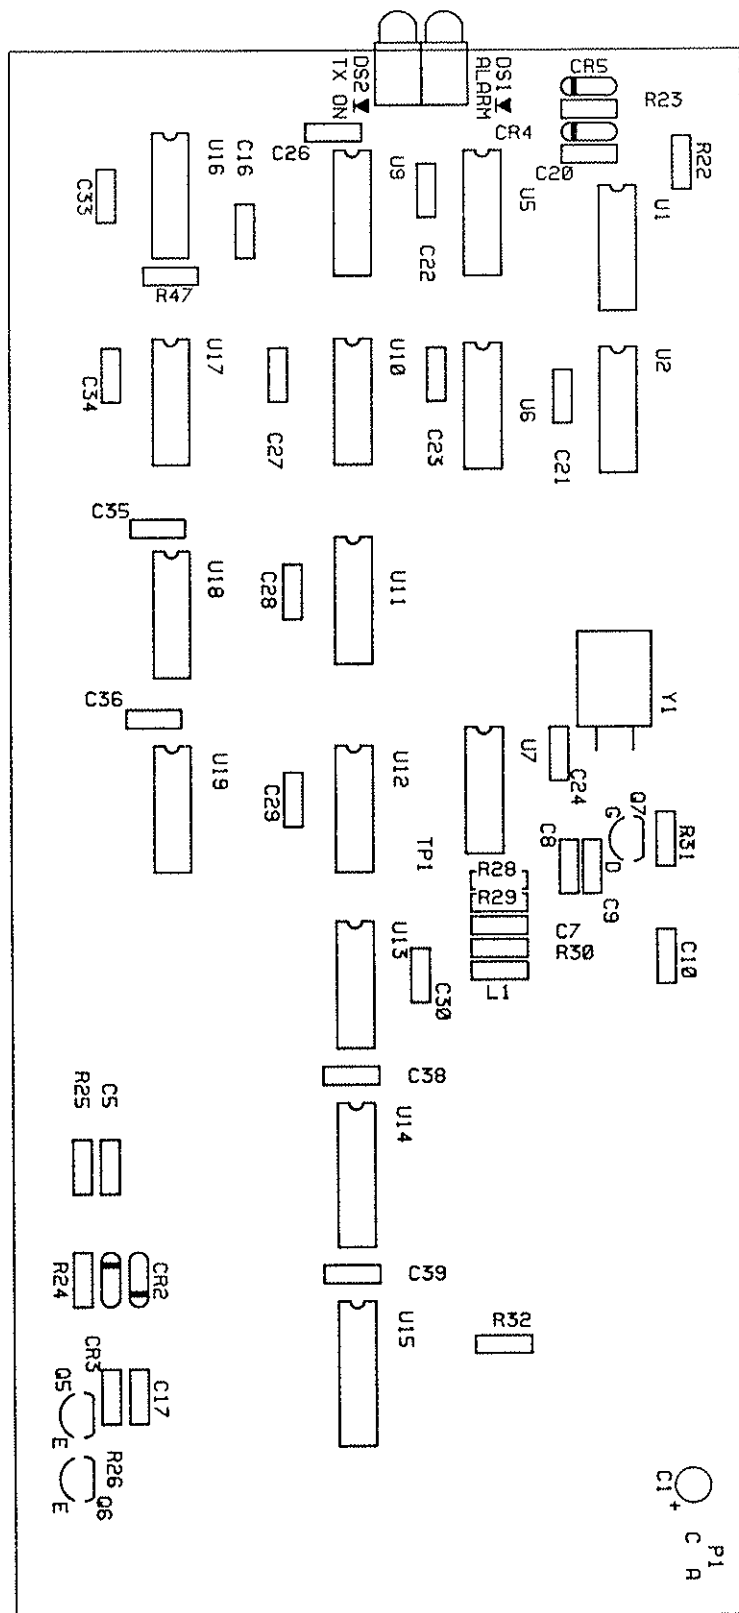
Component locator drawing, RFL 97 FO INTX Single-Input Fiber Optic Transmitter Module
